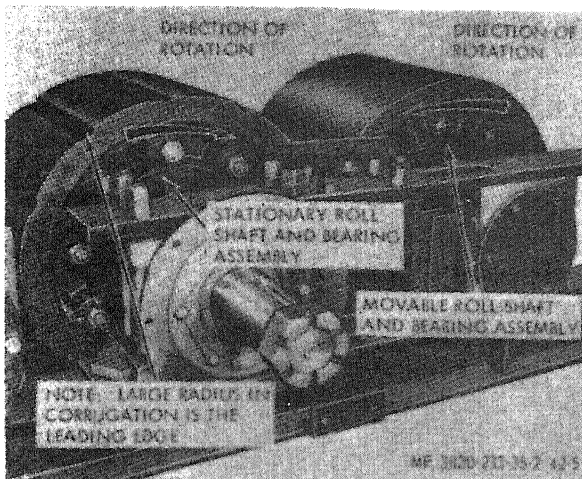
Movable and stationary roll shaft and bearing assembly, removal and installation.
